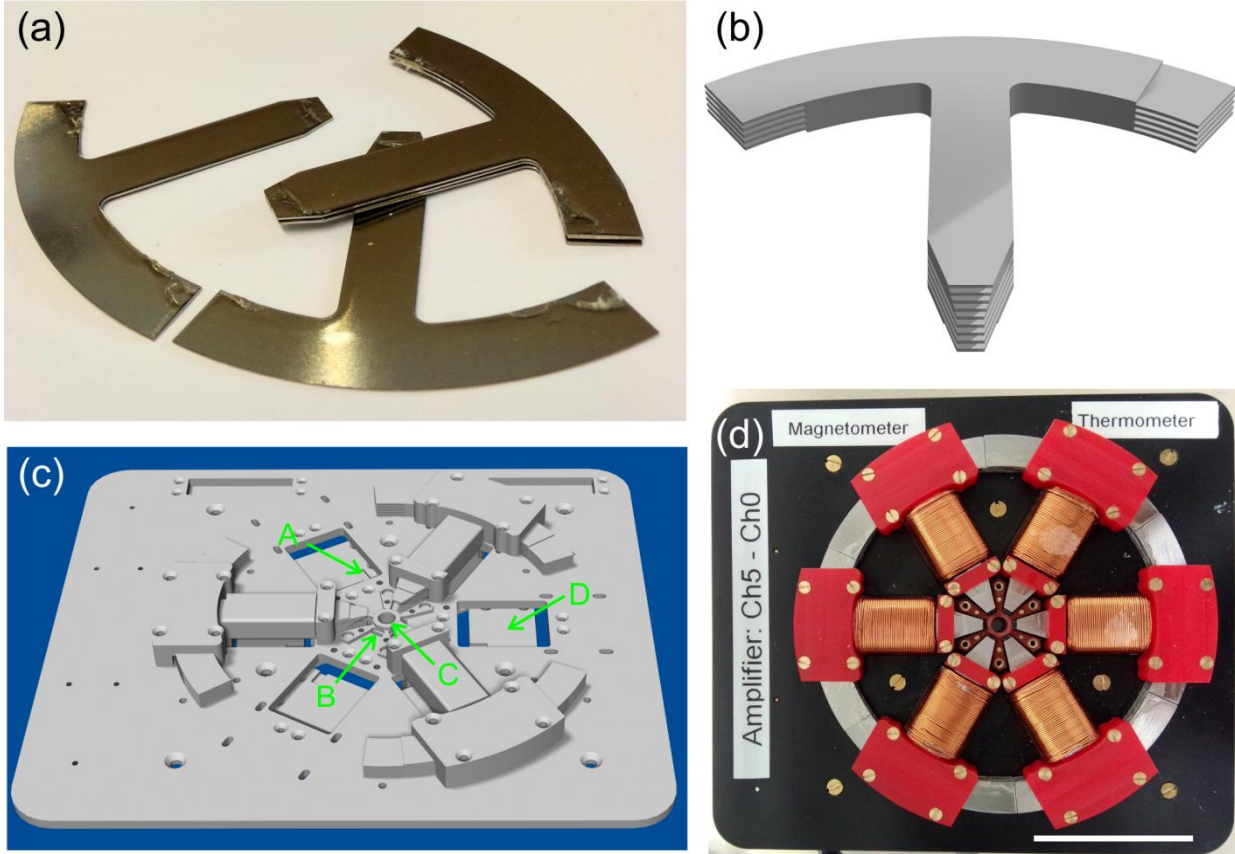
(a) Main yoke sub-unit. (b) CAD drawing of one pole of the yoke, assembled from 10 pieces, bottom view. (c) The CAD drawing of the actuator. (d) Photograph of the actuator. Scale bar is 50 mm.
